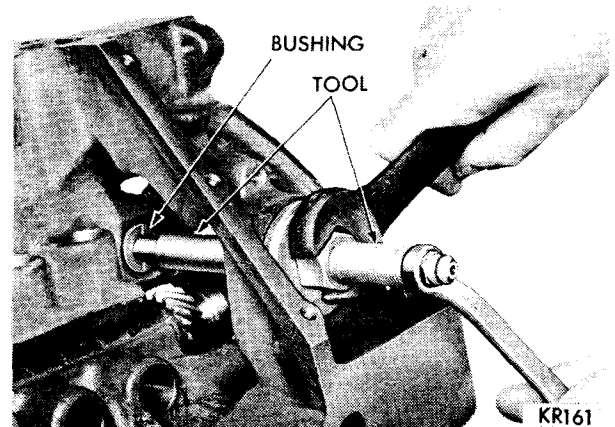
Burnishing Distributor Drive Shaft Bushing
